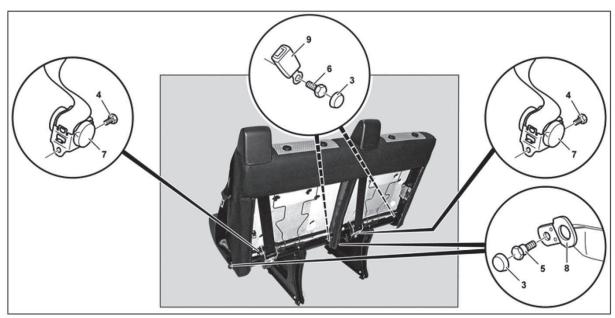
(7: Seat belt retractor; 8: Seat belt end fitting; 9: Seat belt buckle)
